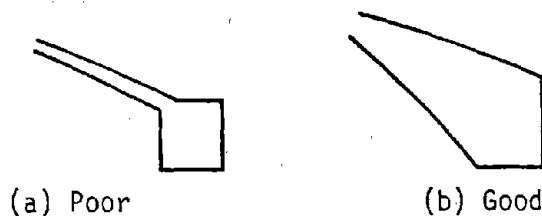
Roof-to-shell connections for storage tanks are improved by avoiding abrupt changes in plate thickness (a). Thickness changes should be gradual (b) (098).
